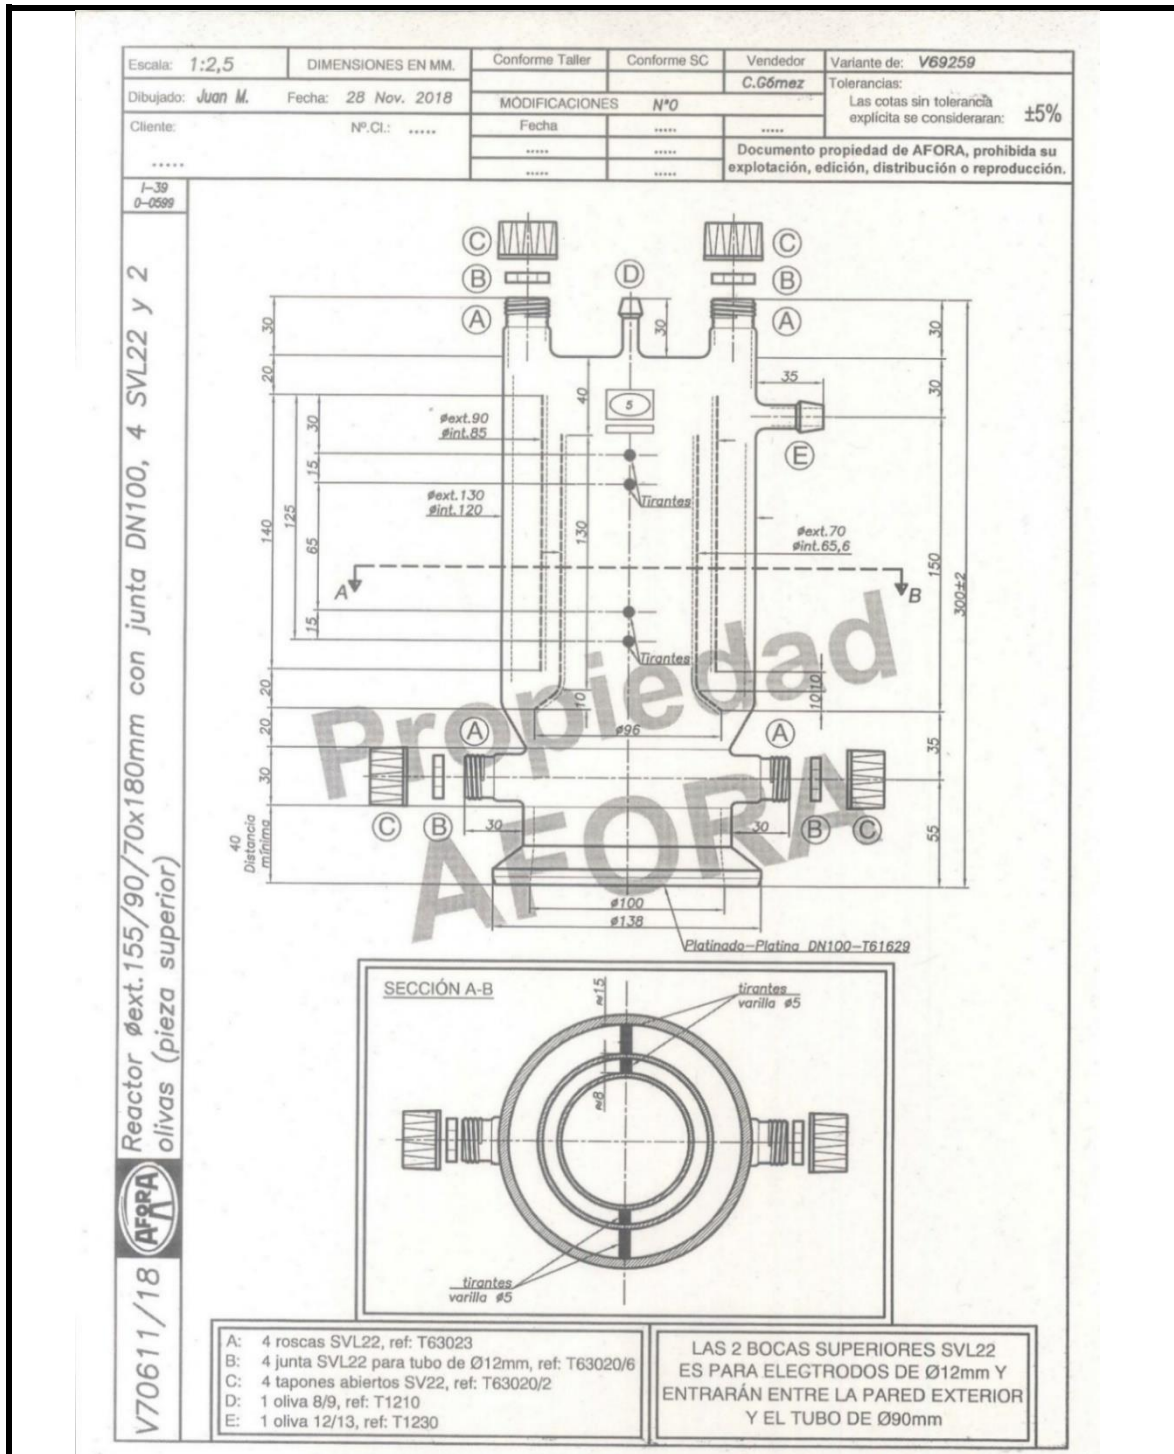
GLR dimensions of the upper part (the three-phase separator).
